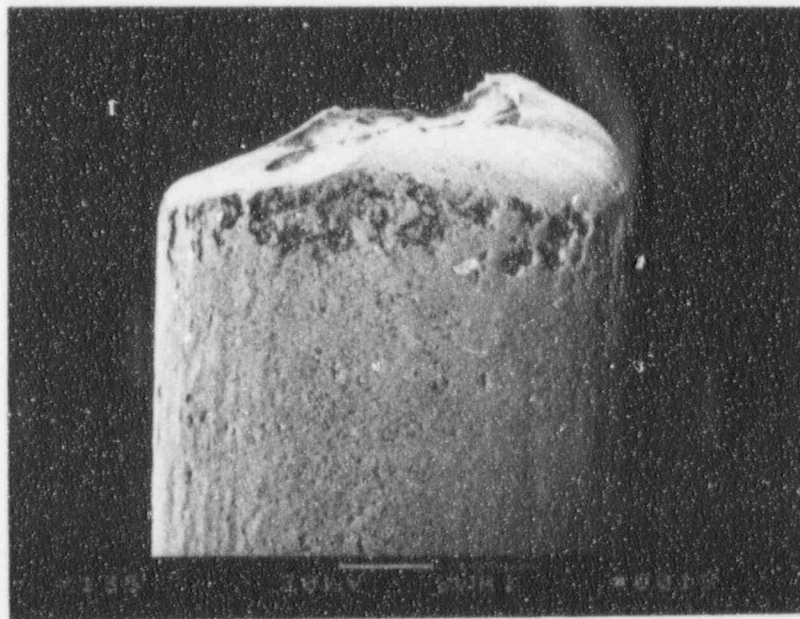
SEM Fractographs of SwRI Wire No. 421-1
